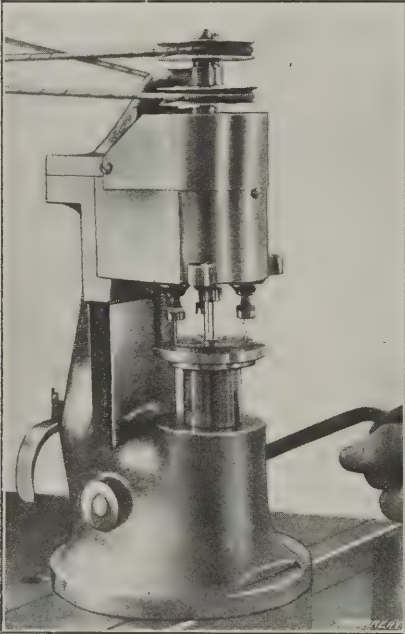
Three-spindle Drill Press for Drilling Dial Foot Holes in Watch Plates
